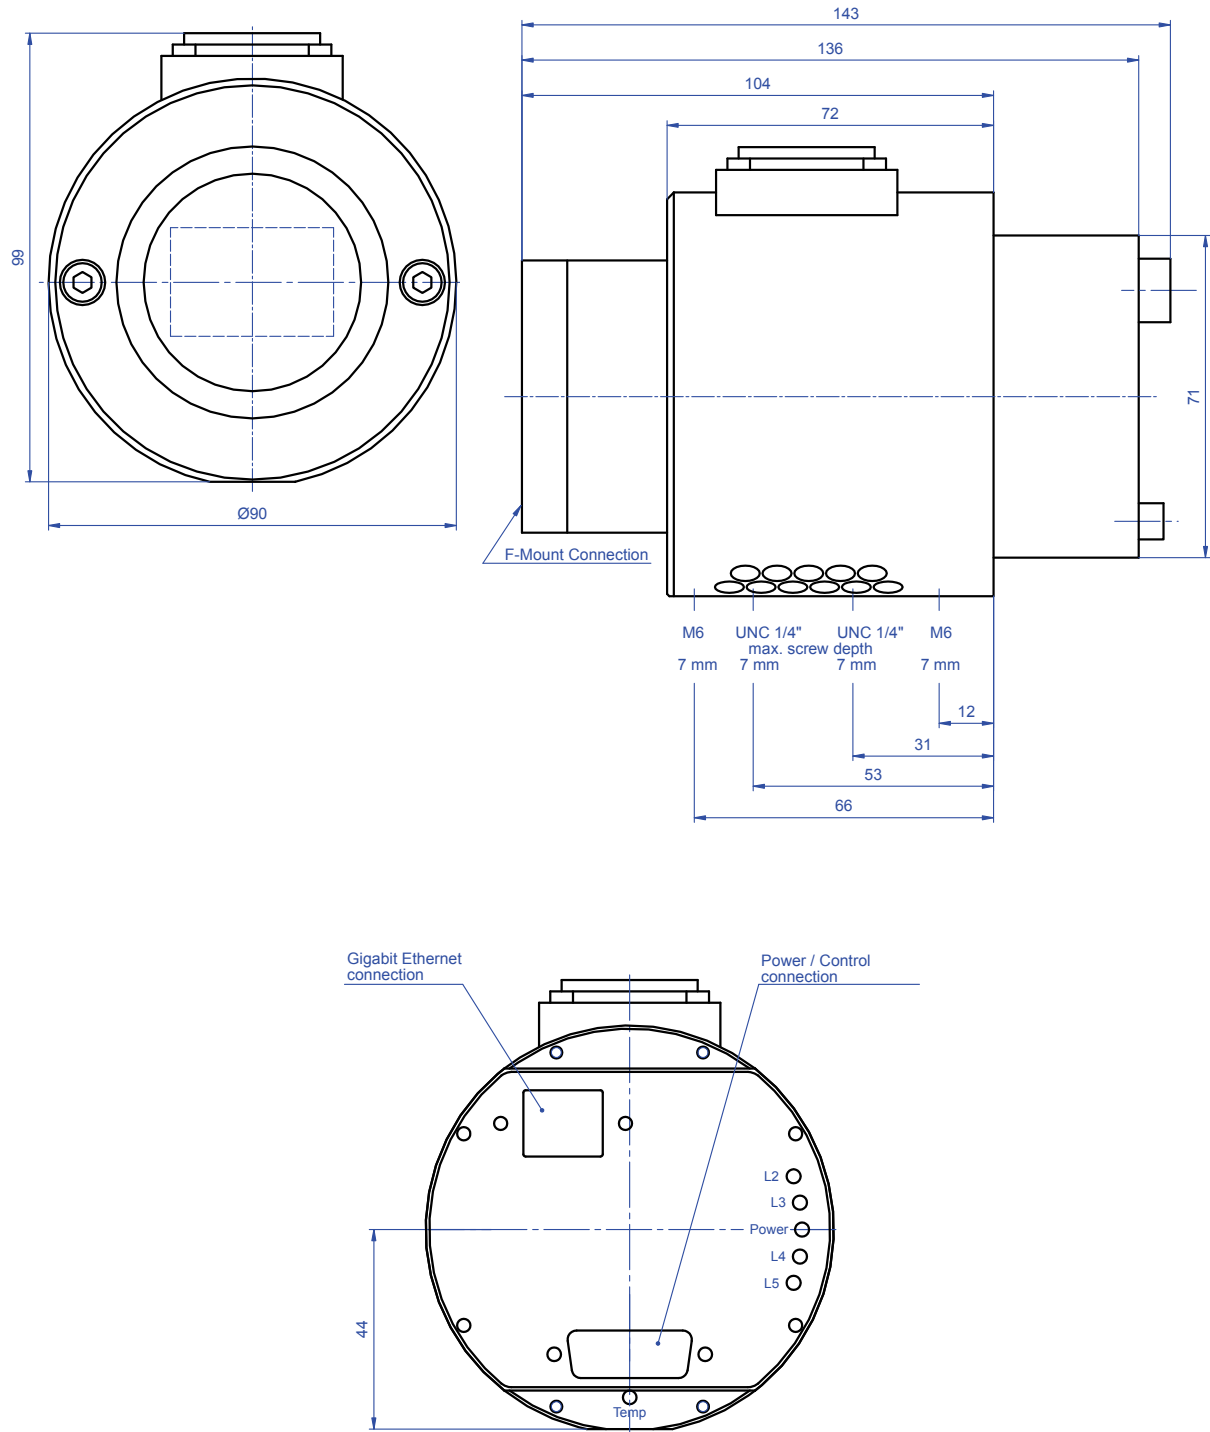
Camera dimensions: Bigeye P-1100B/C Cool (front/side/back)
